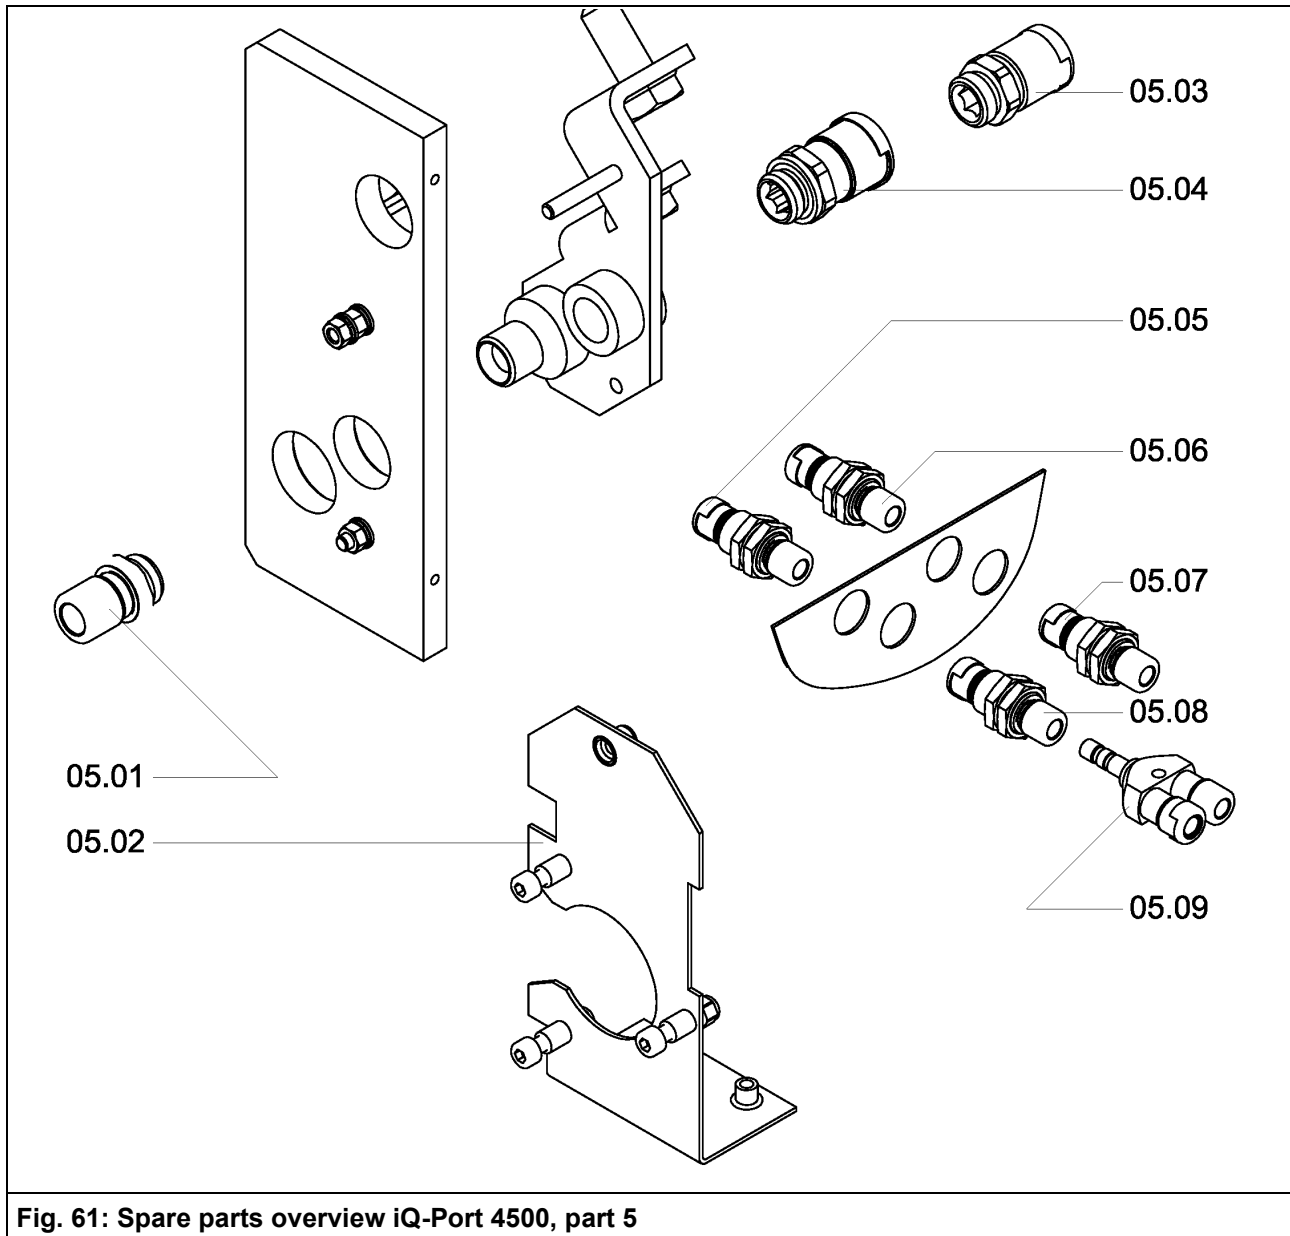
Spare parts overview iQ-Port 4500, part 5
